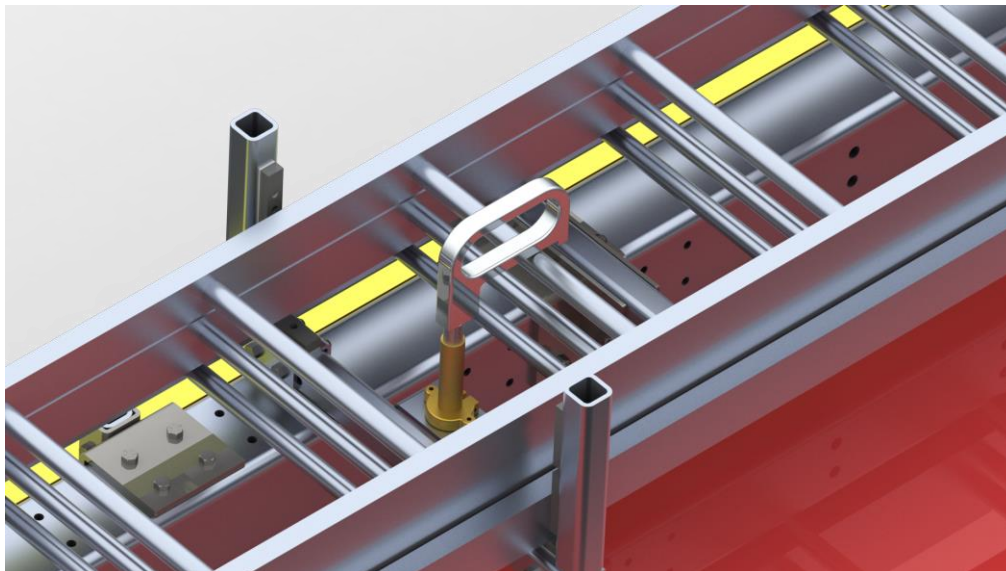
Render of Zico handle mount in assemble retaining ladders isometric view.
